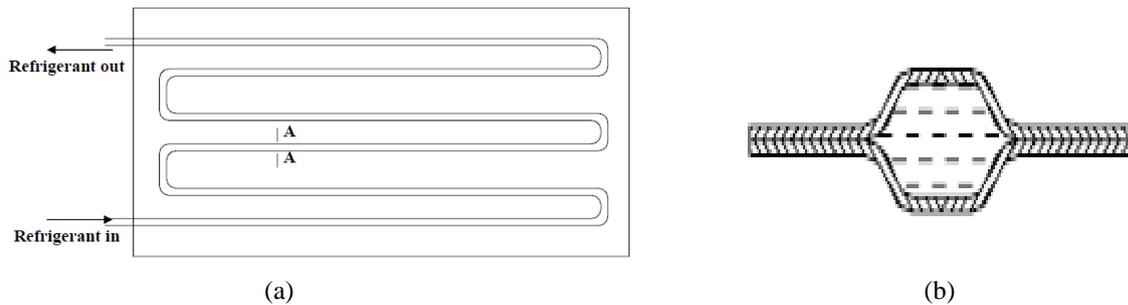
Roll bond evaporator to be used in room air conditioner, showing the path of refrigerant (a) Roll bond panel as evaporator (b) Flow of refrigerant through the roll bond evaporator at section A-A
